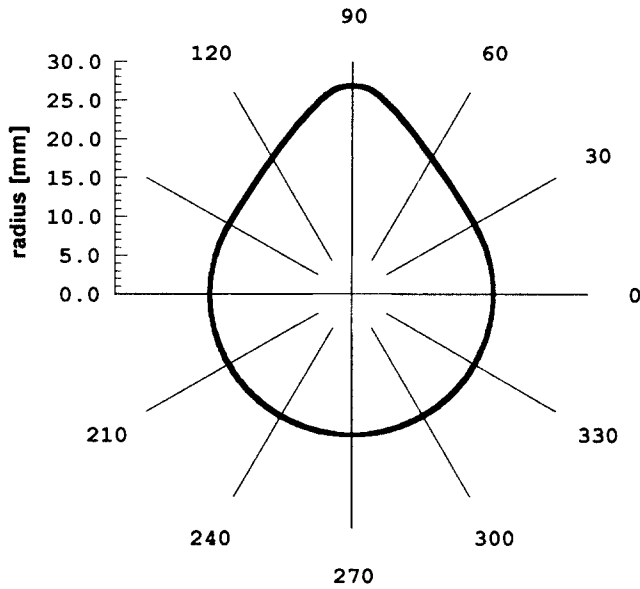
Designed cam profile for the desired valve lift in a given pushrod type valve train system with flat follower
